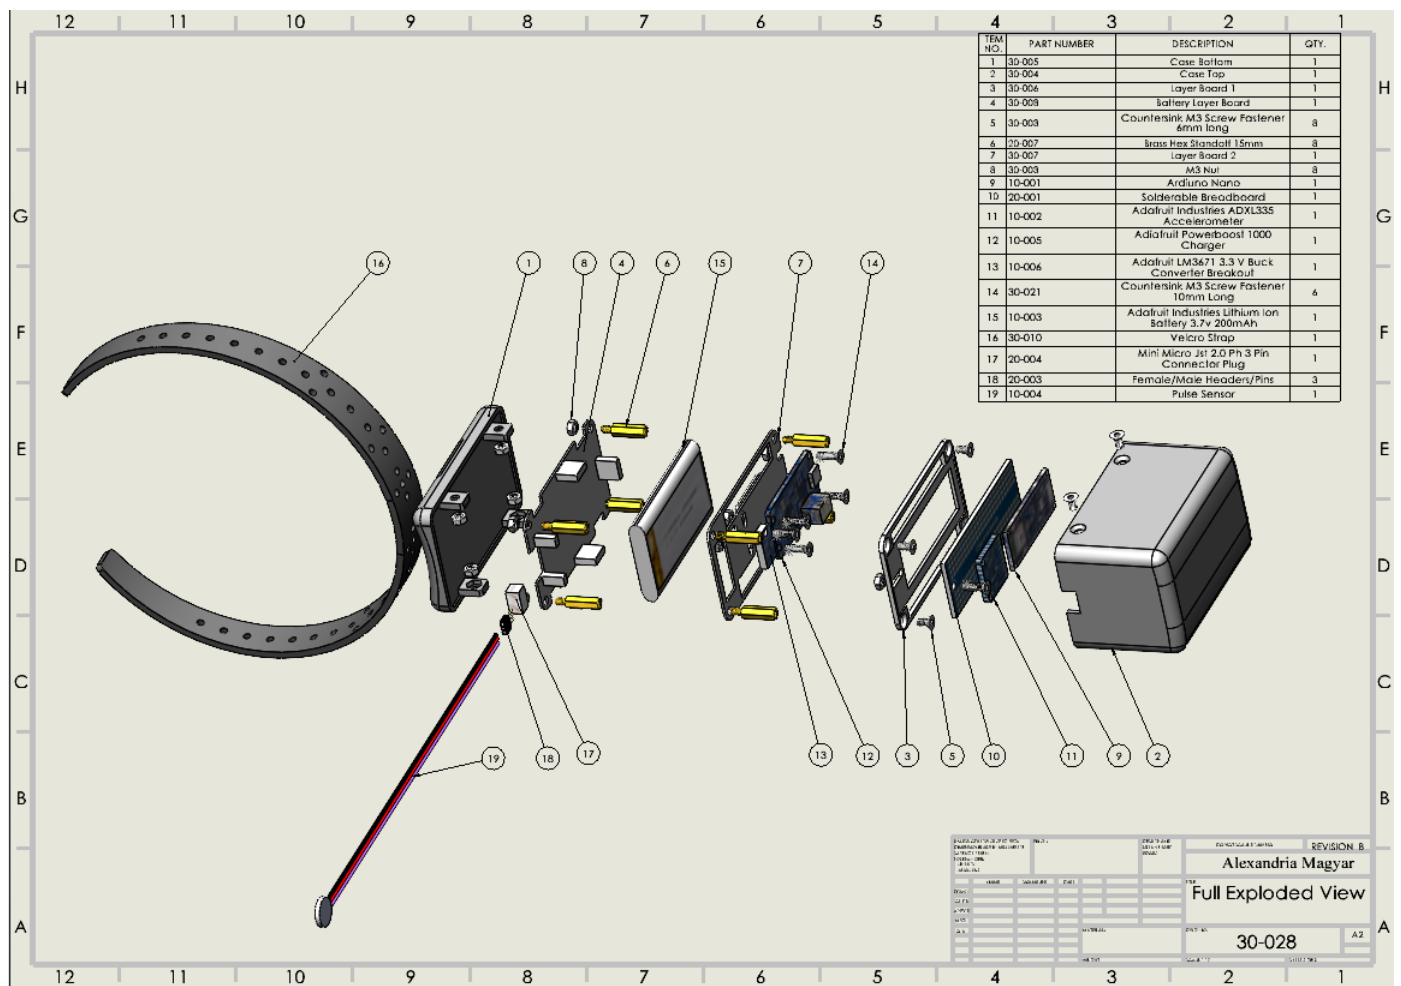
SolidWorks Exploded Assembly of Device Casing and Electronics
